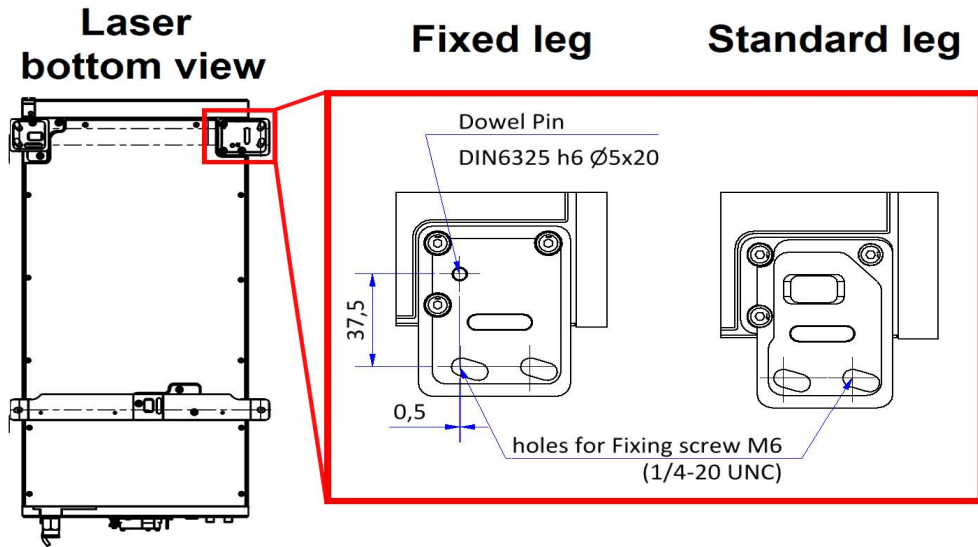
Dimensions of a CARBIDE laser's standard mounting leg and a fixed mounting leg, which replaces the front-left leg for vertical installation (shown in bottom view)
